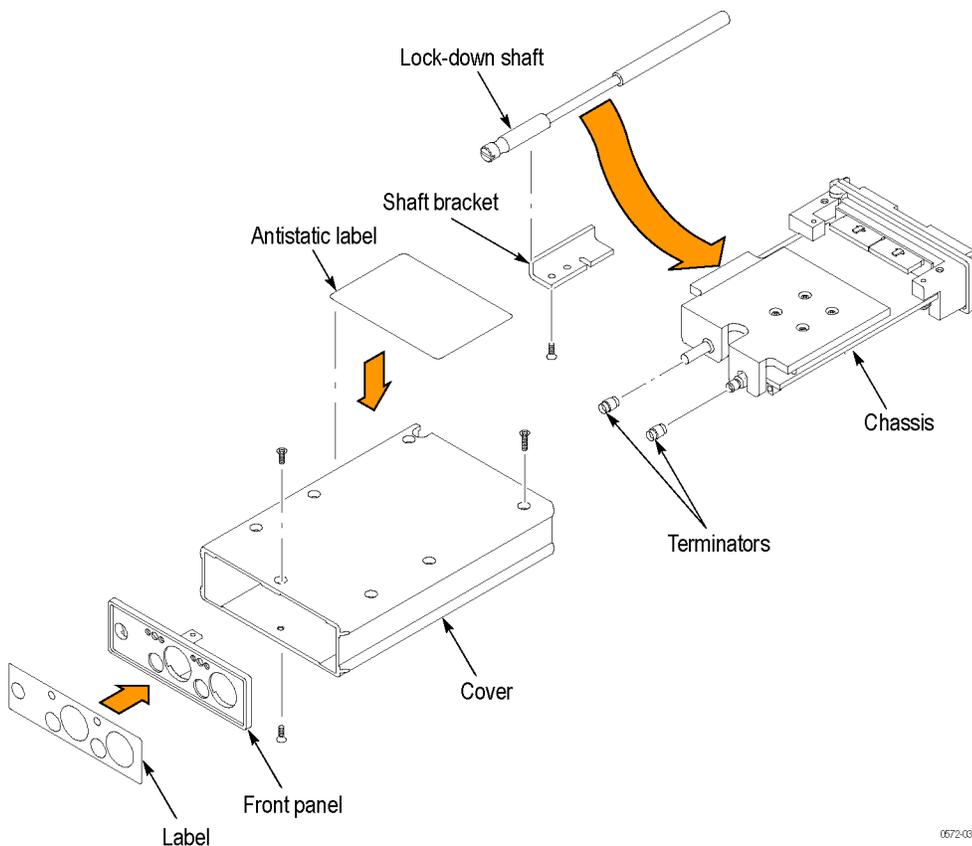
80A00 and 82A00 series parts removal (80A01 shown)
